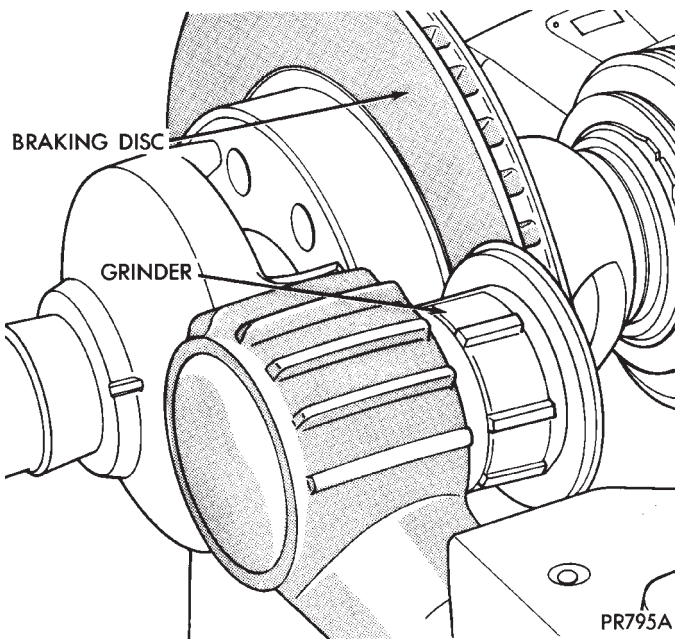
Resurfacing Brake Rotor (Final Finish)
